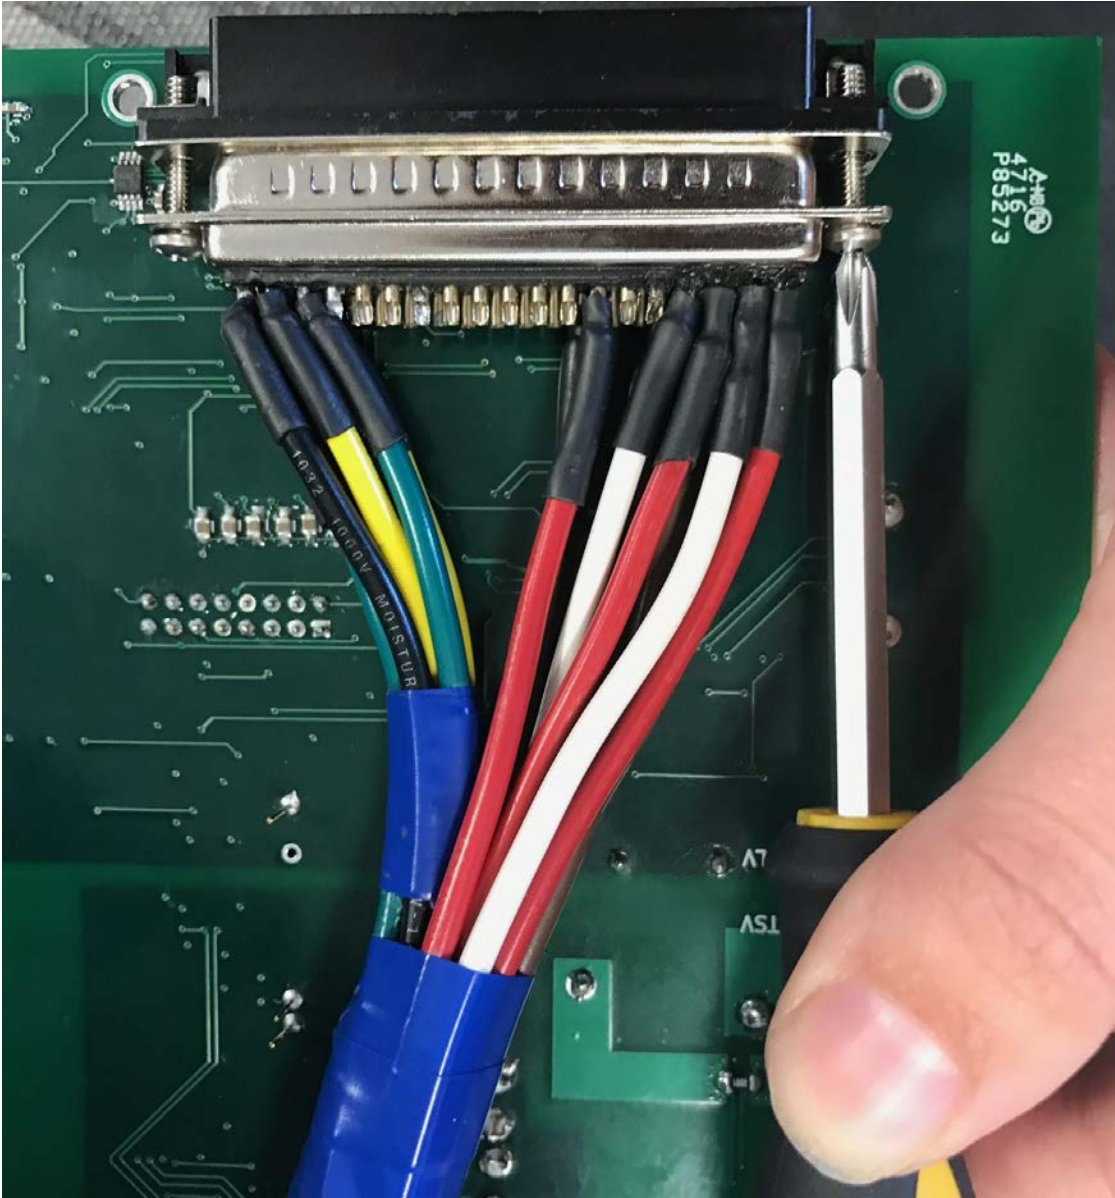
Installed 37 Pin connector using the two 4-40 x 5/8 Button Head Socket Cap Screw.
